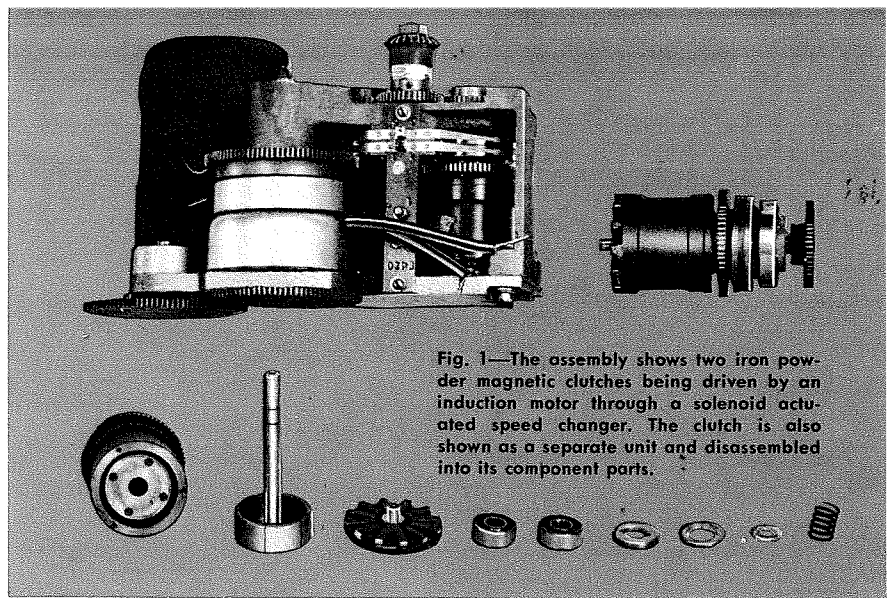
The assembly shows two iron powder magnetic clutches being driven by an induction motor through a solenoid actuated speed changer. The clutch is also shown as a separate unit and disassembled into its component parts.
